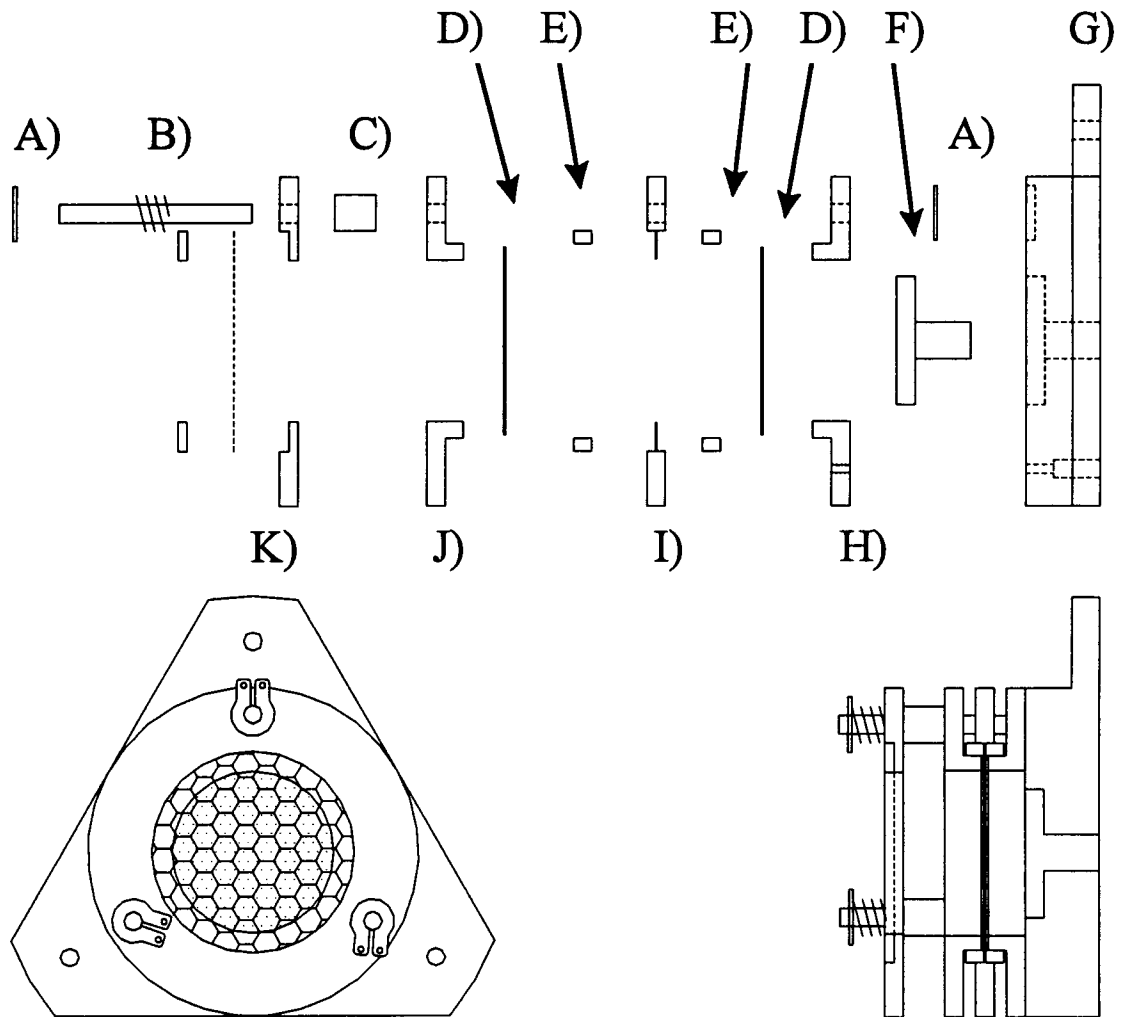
Exploded and assembled views of the micro-channel plate detector. A) Snap ring fastener. B) Al_2O_3 rod and tension spring. C) Al_2O_3 spacer. D) Microchannel plate. E) Delrin spacer. F) Stainless anode. G) White delrin backing plate. H) Stainless base ring. I) Stainless shim ring between microchannel plates. J) Stainless top ring. K) Stainless grounding ring and wire grid.
